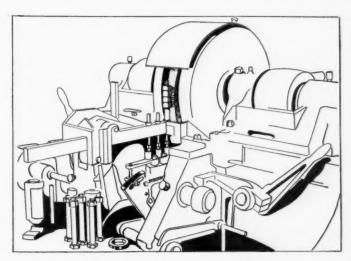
Grinding hexagon nuts and spark plug shells in Badger disk grinder
